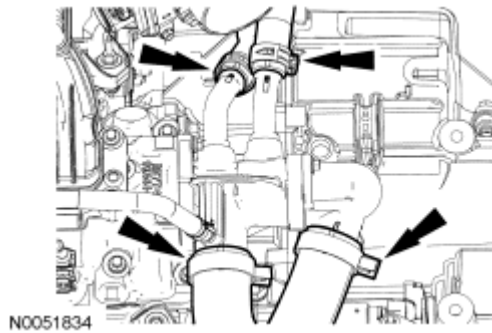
Locating Upper Radiator Hose, Lower Radiator Hose & Heater Hoses
